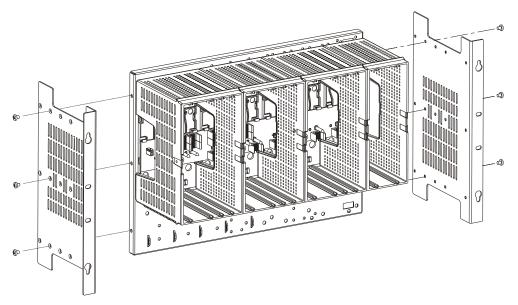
Attaching Brackets to 19" Frame - Exploded View
